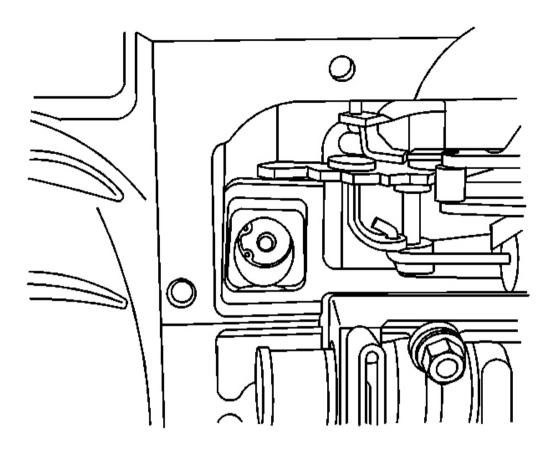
Locating Reverse Boost Valve Courtesy of GENERAL MOTORS CORP.
